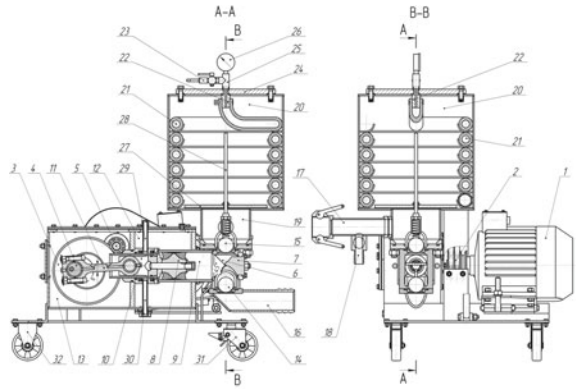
Single pump with pressure pulsation compensator: 1—electric motor; 2—Cape Harbor transmission; 3—gear wheel; 4—crankshaft; 5—gear shaft; 6—suction chamber; 7—special insert; 8—piston; 9—working cylinder; 10—a slider; 11—a connecting rod; 12—camera; 13—gearbox housing; 14, 15—suction and pressure spring-loaded ball valves; 16—suction pipe; 17—injection nozzle; 18—cylindrical chamber; 19—locked camera; 20—base; 21—upper cover; 22—rubber-coated diaphragm; 23—nozzle; 24—nipple; 25, 28—pressure gauge; 26—pressure drop valve; 27—pressure relay; 29—diaphragm chamber
